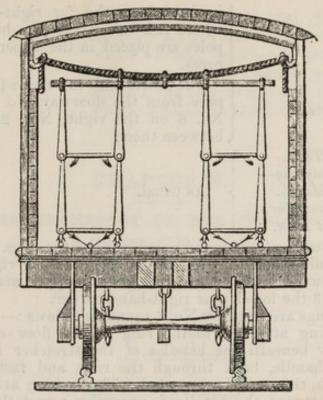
Transverse Section of a Goods Wagon fitted on Zavodovski's Plan.
